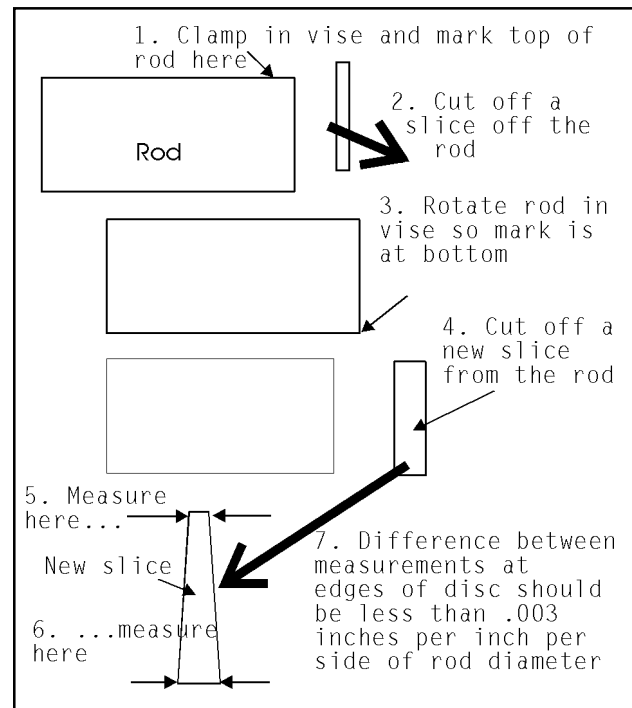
Step-by-step method to produce a test disc which can be measured for "wedge" - a measurement for testing cutting accuracy.
